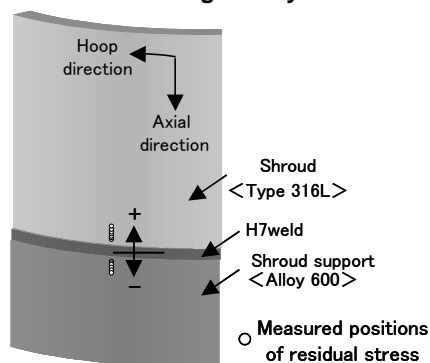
Positions of residual stress measurement on shroud component (H7 weld line) after WJP at construction site.
